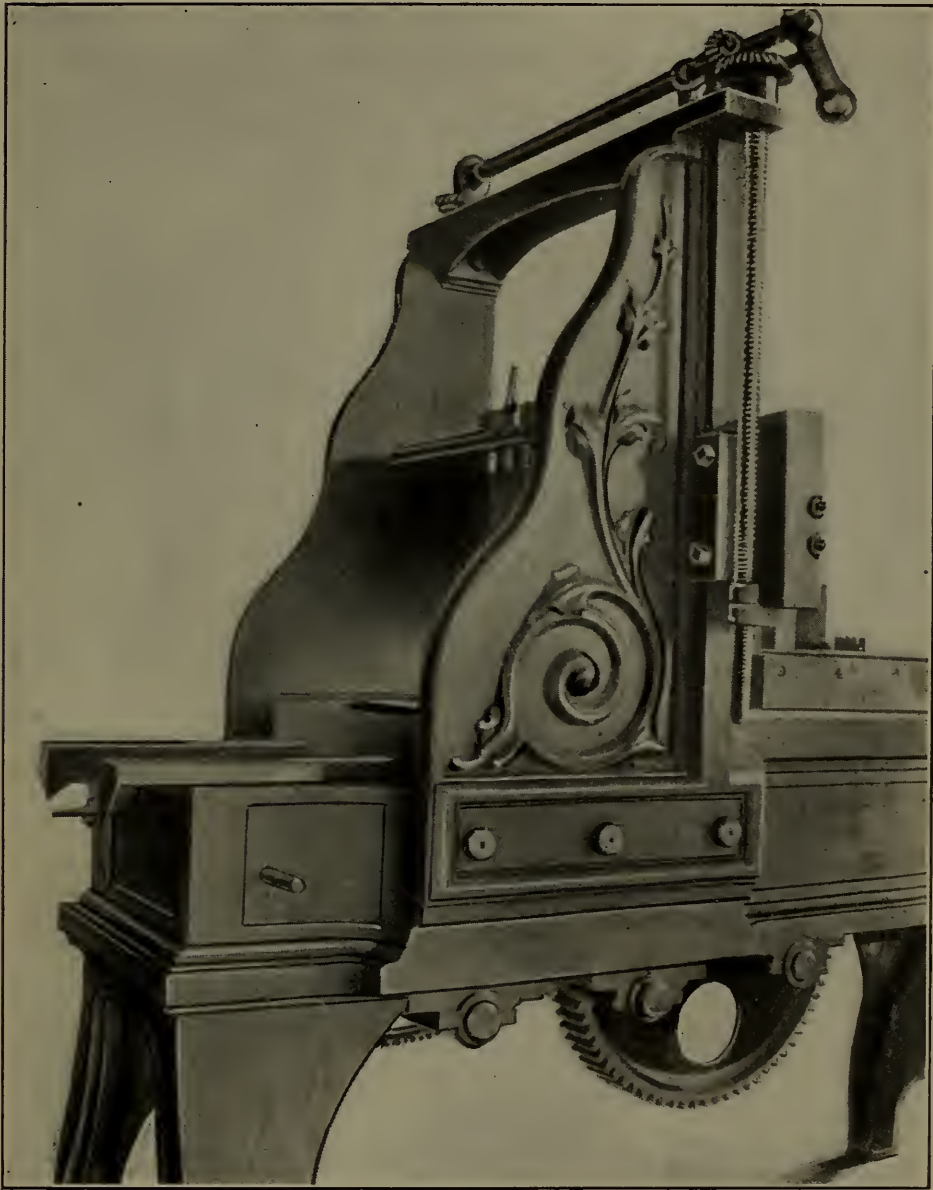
OLD PLANING MACHINE. AN EXAMPLE OF ELABORATE ORNAMENTATION.
